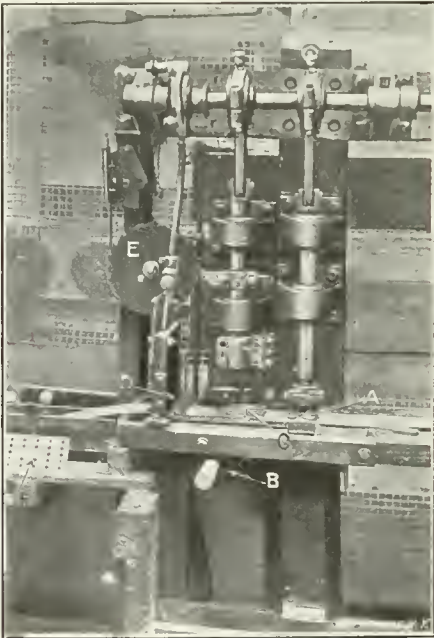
The Perforating, Feeding and Shearing Mechanism of the Automatic Machine
